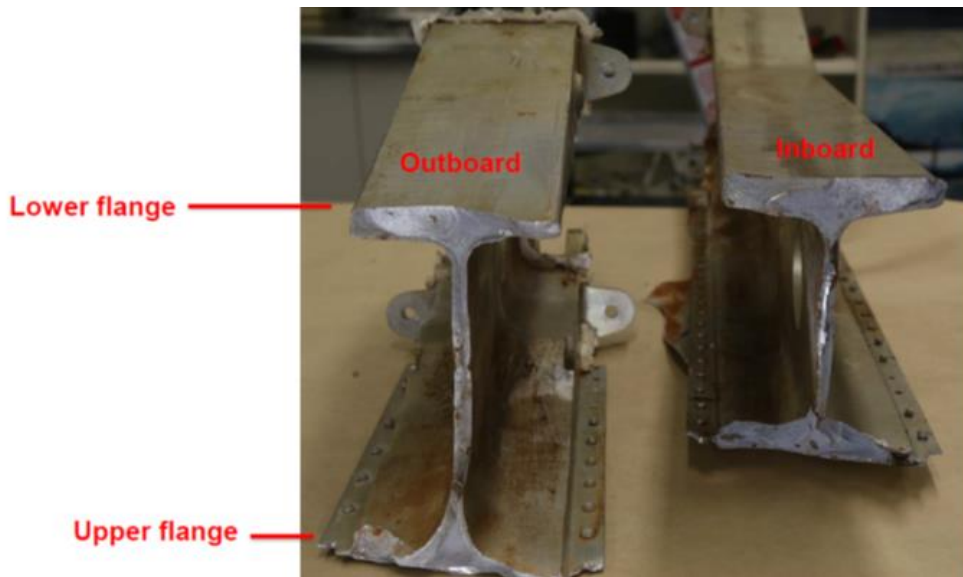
Photograph of Cessna T210M Fractured Carry -Thru Spar Fracture Surfaces
